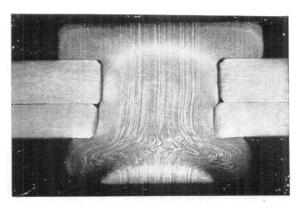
Example of a well-formed rivet which conforms to the conditions specified in the text; enlarged.
